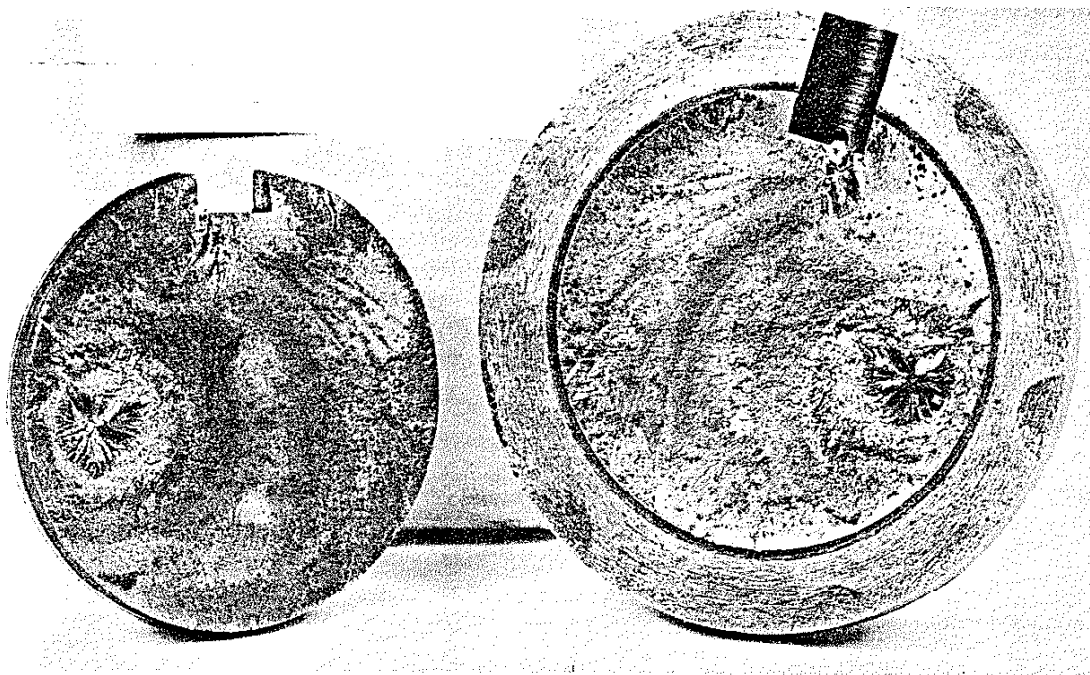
Fracture Surfaces of Shaft in Rotating Bending Resulting from Poor Design Detail. (AISI 1046 Heat Treated to Rockwell C25)
